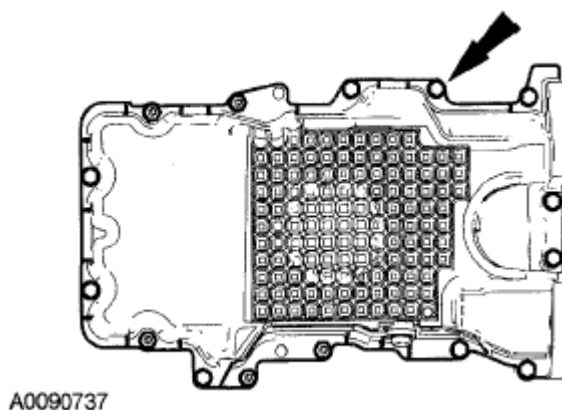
Locating Oil Pan Bolts And Stud Bolts
